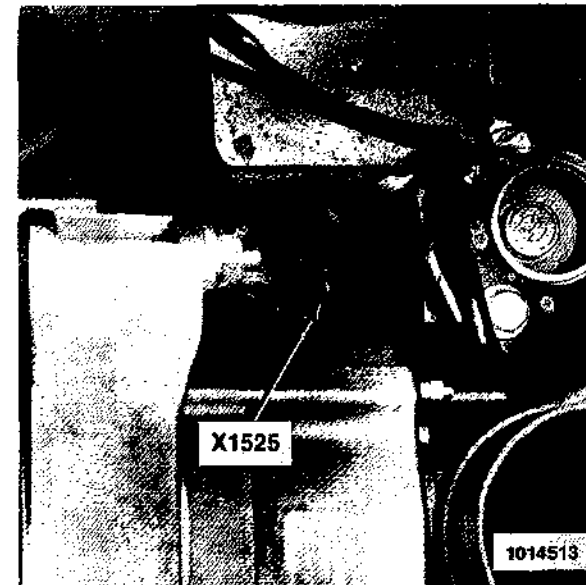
Lower LH Front Of Engine (M20 Engine) (Air Flow Assembly Removed)
